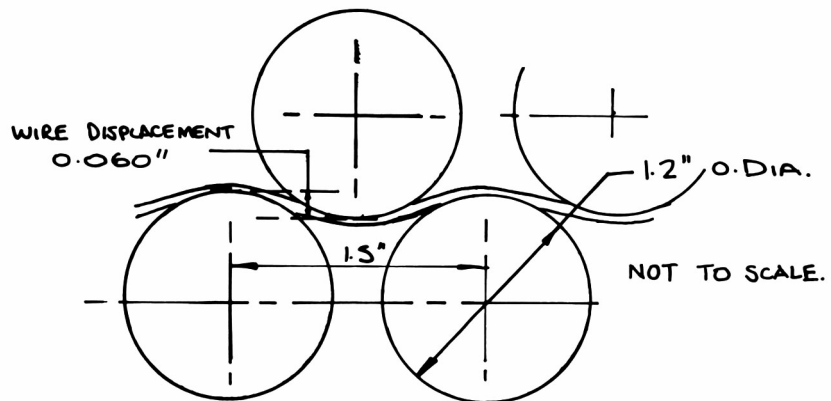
WIRE DISPLACEMENT THROUGH ROLLERS
